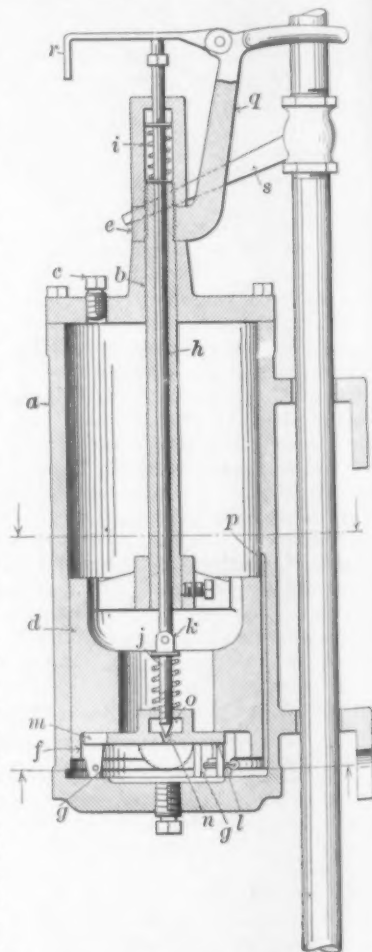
Detail View of the Apparatus Showing the Arrangement of the Various Parts
